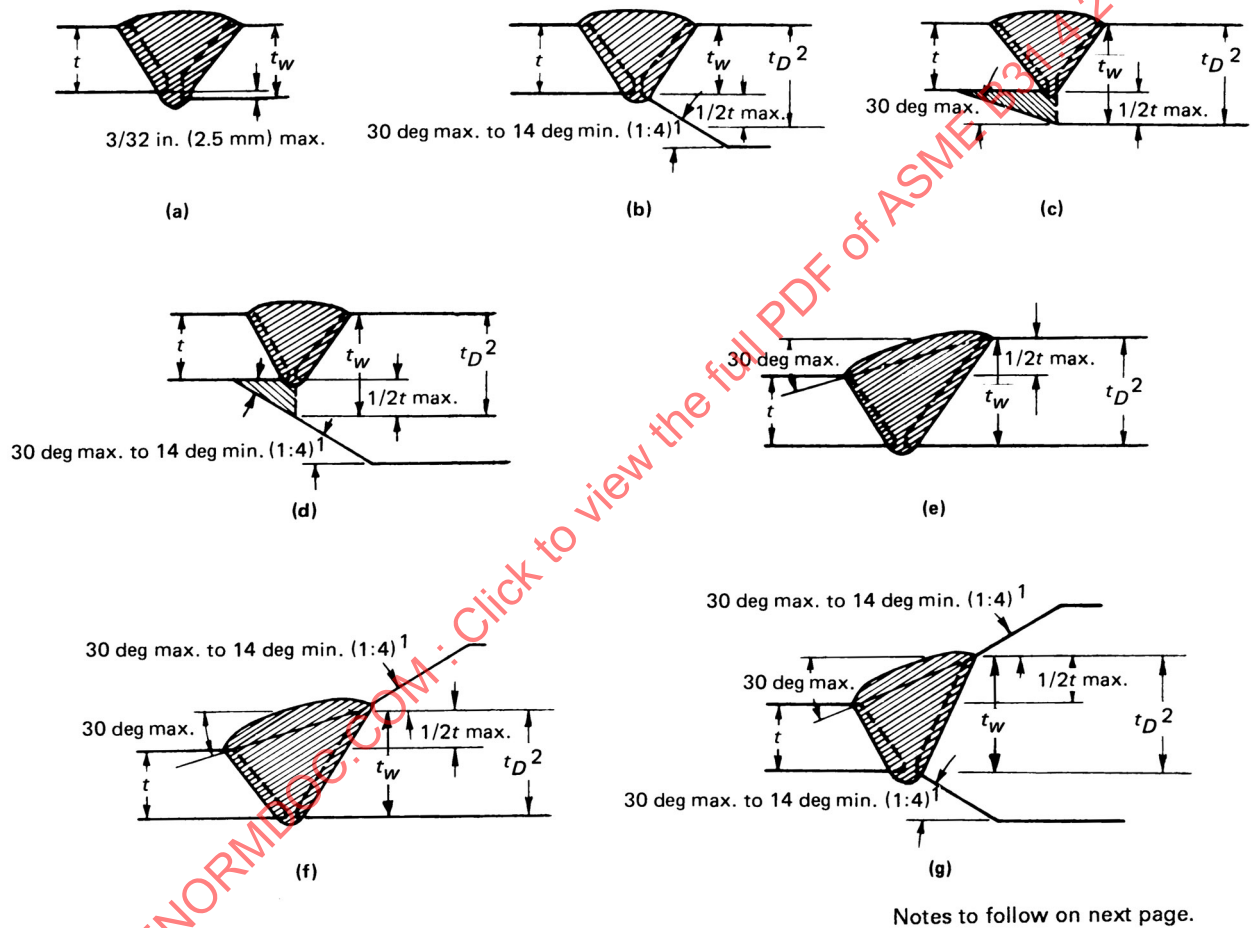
(a)-(2) Acceptable Butt Welded Joint Design for Unequal Wall Thicknesses
